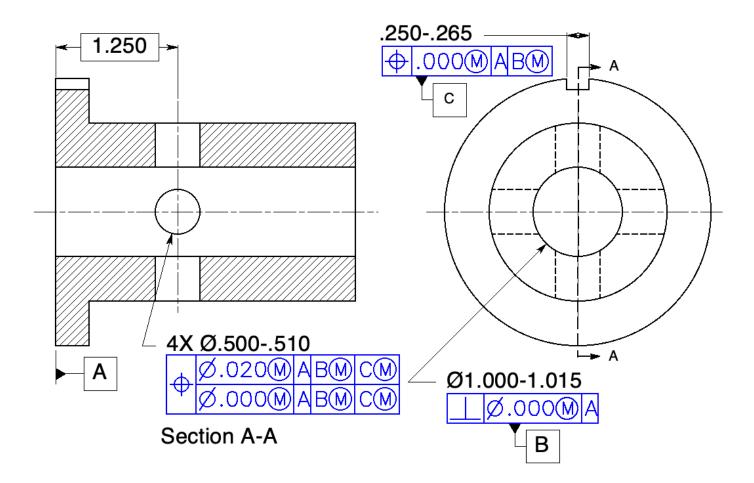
Composite positional tolerancing locating a radial hole pattern: Prob. 22.
